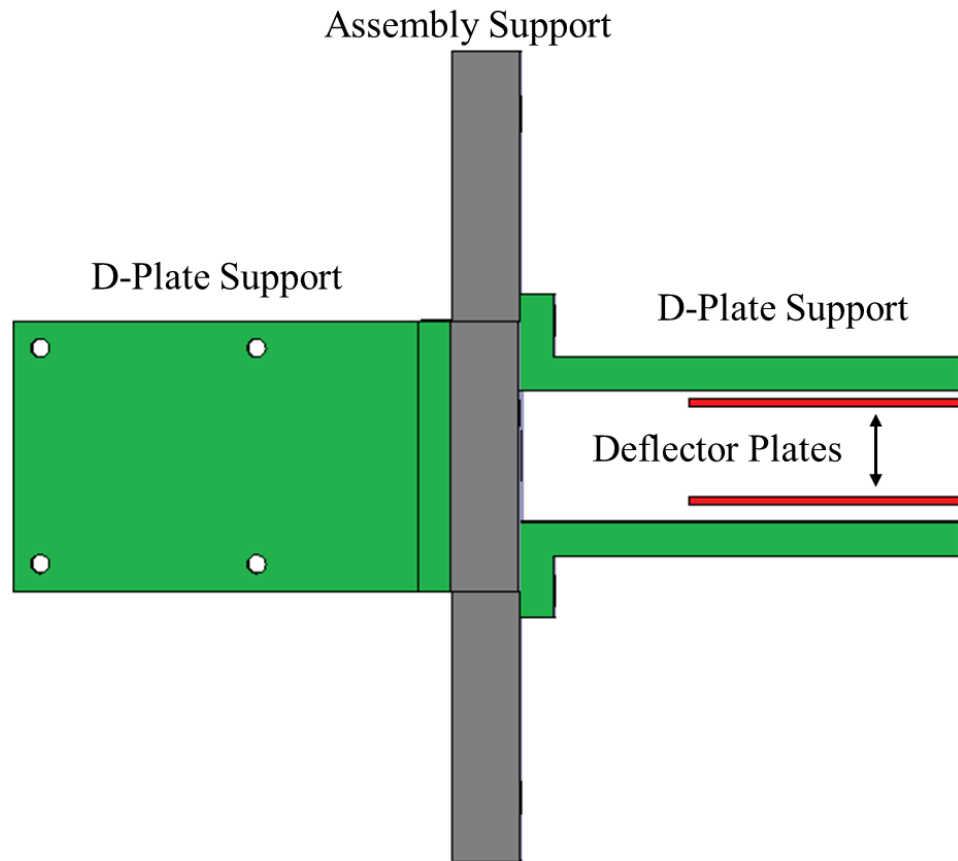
Drawing of a deflector plate assembly (Color). Deflector Plates (red), Deflector Plate Support (D – Plate Support, green), Assembly Support (grey).
